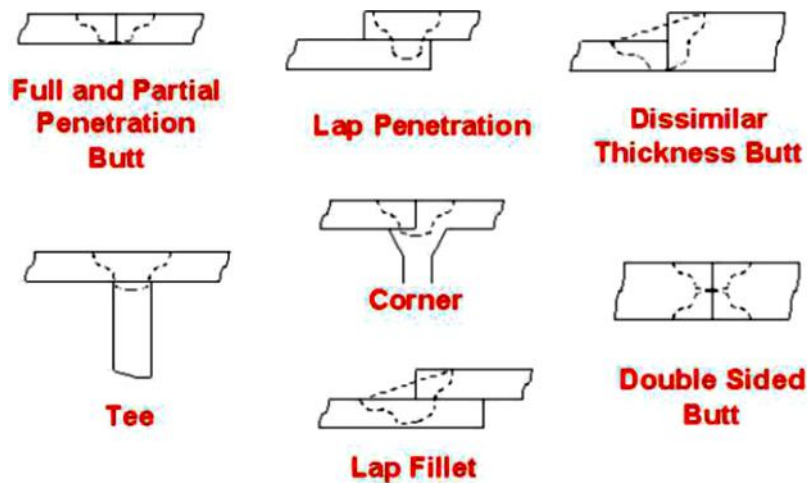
Configuration of Friction Stir Welding (Singh, 2014)
